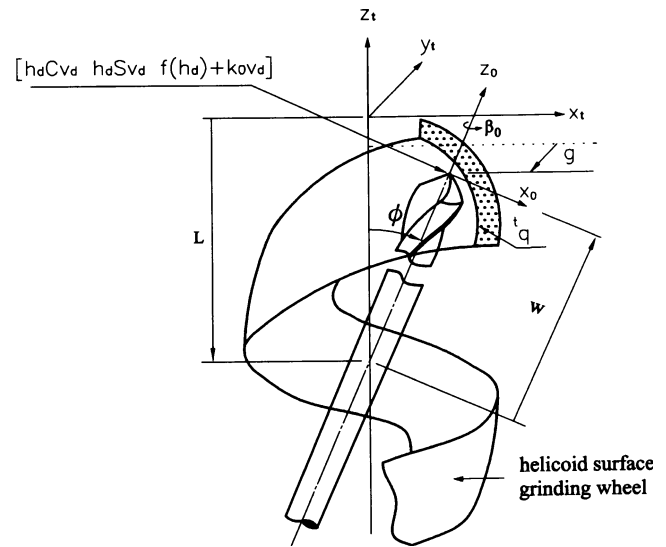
Grinding of drill flank surfaces using form\_grinding tool [6]
